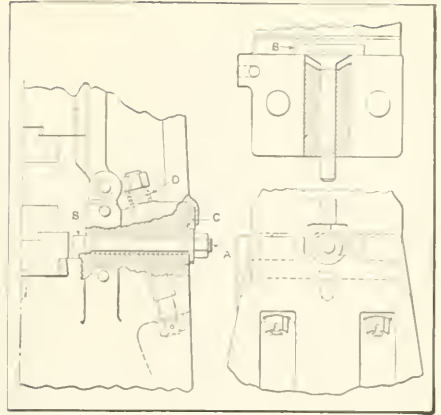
Upright Adjusting Bolt of T-head Pattern
